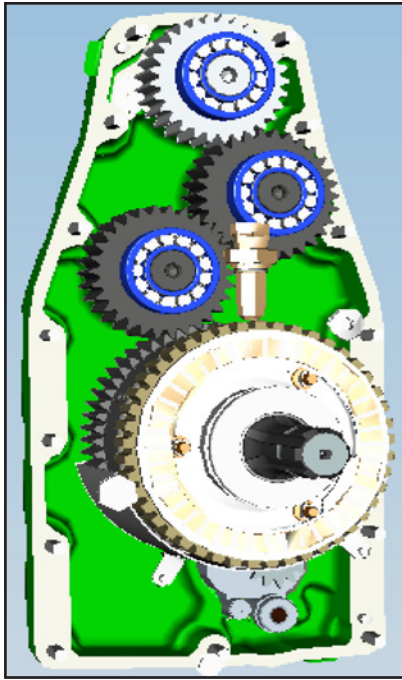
Front PTO gearbox with two idlers; the input is at the top (CCW rotation), then gears 2 and 3 and the output at the bottom.
